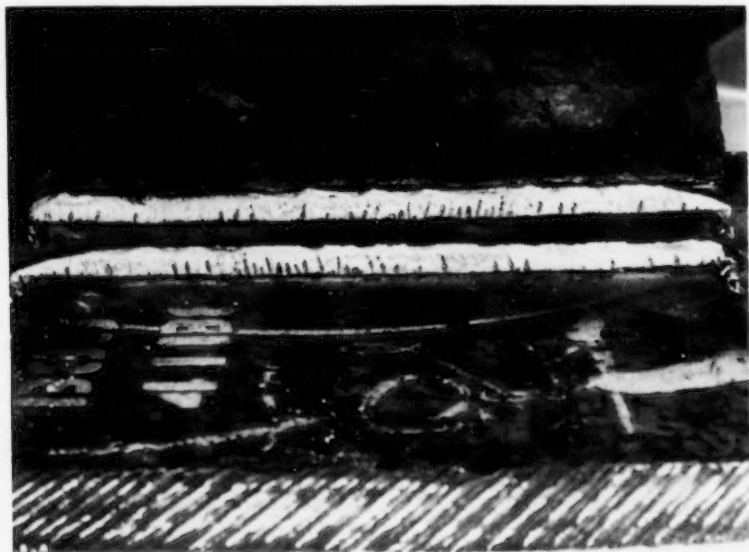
Welding is also affected by moisture, mill scale, rust, oil, dirt, etc. Here can be seen "worm holes" in a fillet weld caused by a combination of the above.
